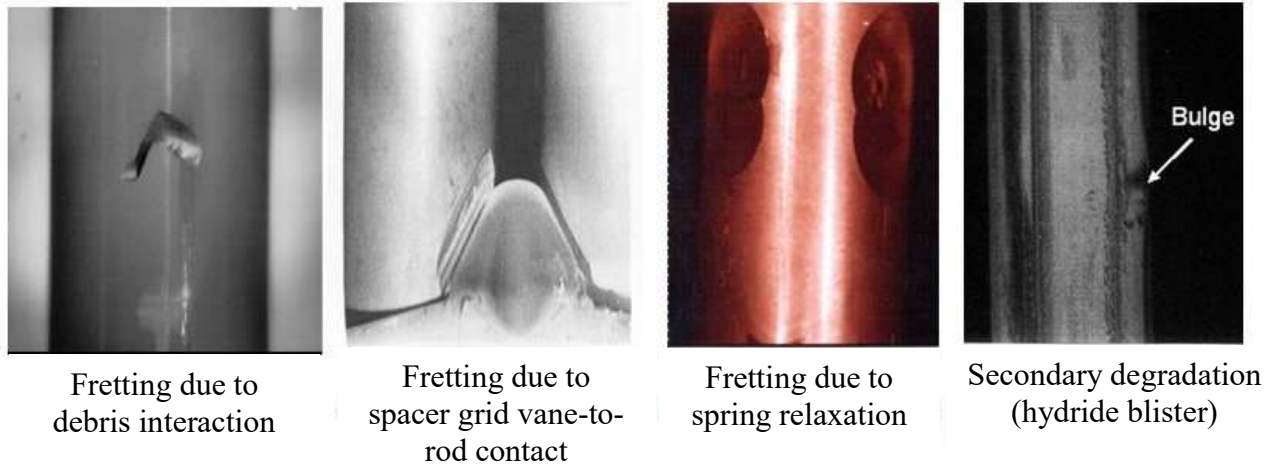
Fuel rod damage due to fretting and secondary degradation (photographs courtesy of Framatome ANP GmbH [4]).
